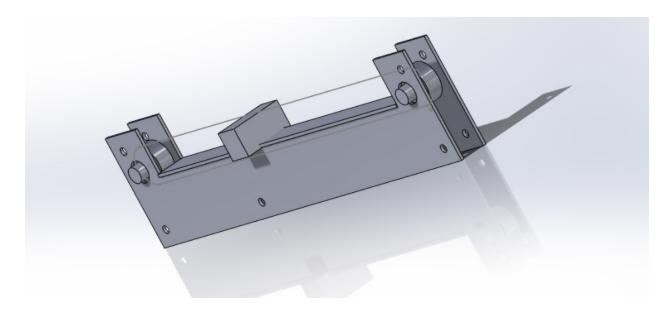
Base assembly. The assembly contains two pulleys with a belt, one mass with a track, and two pieces of plates.
